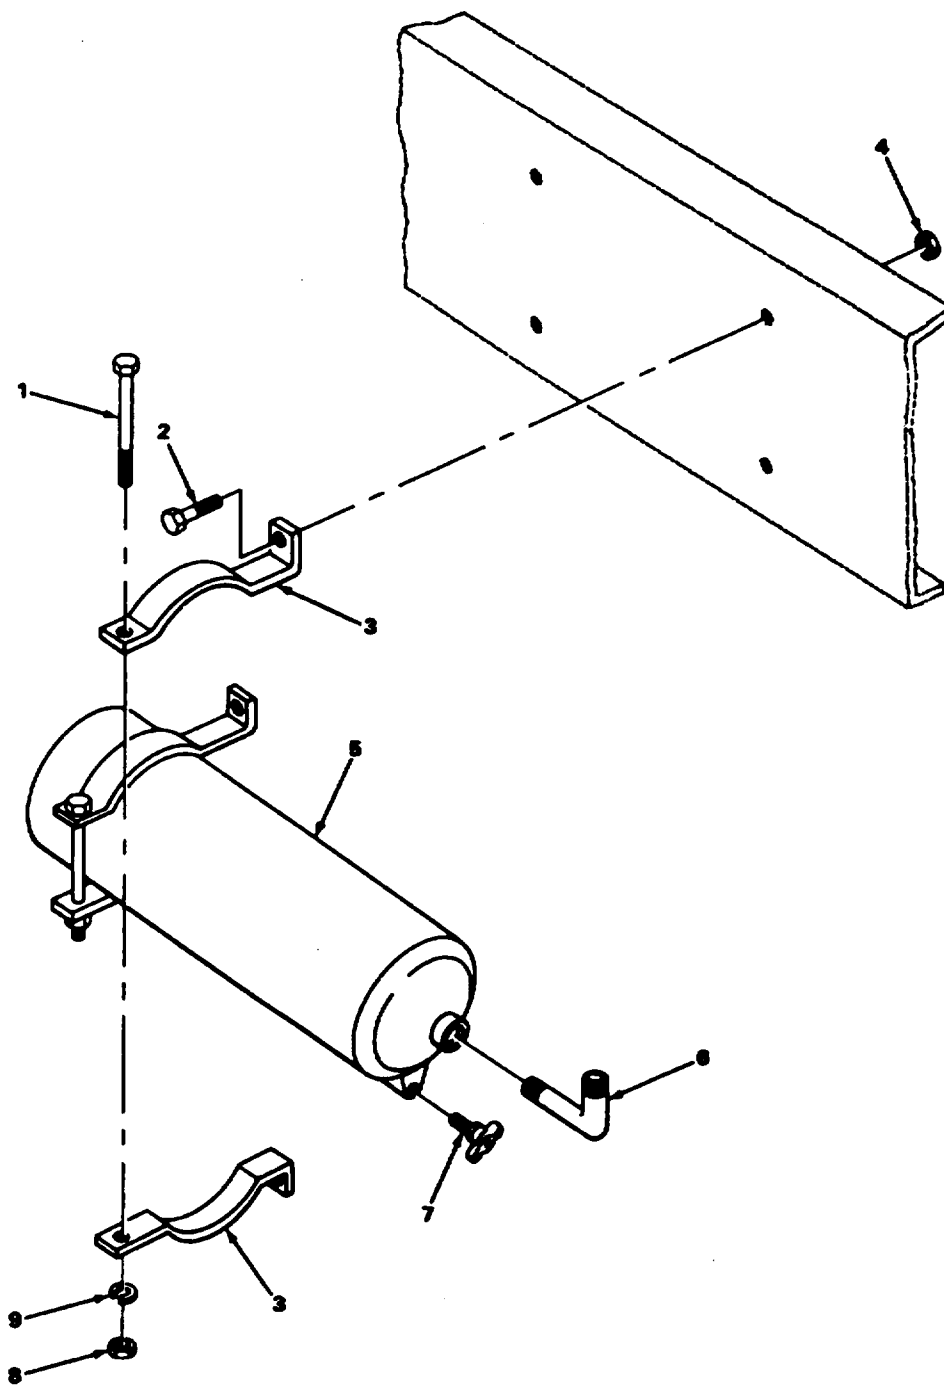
AIR FILTER ASSEMBLY AND EMERGENCY RELAY VALVE.
